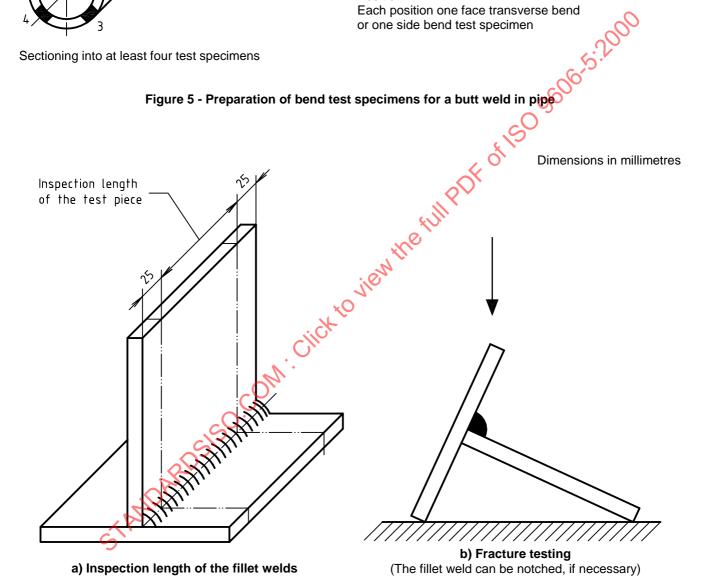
Preparation and fracture testing of test specimens for a fillet weld on plate
